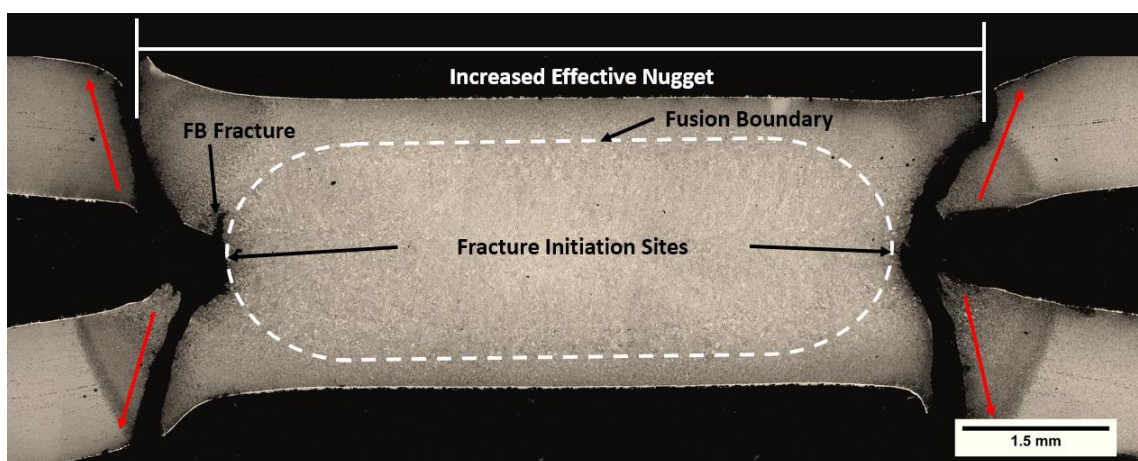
Cross tensile fracture cross-section of as-welded (non-tempered) hot-stamped USIBOR weldment
